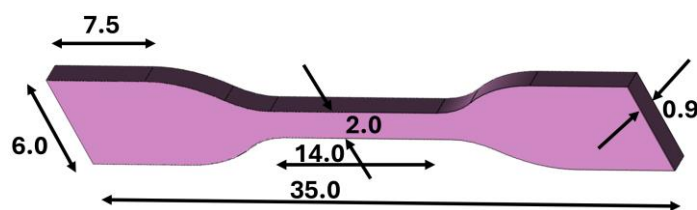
Dimensions of tensile specimen in mm [modified from [91]]
